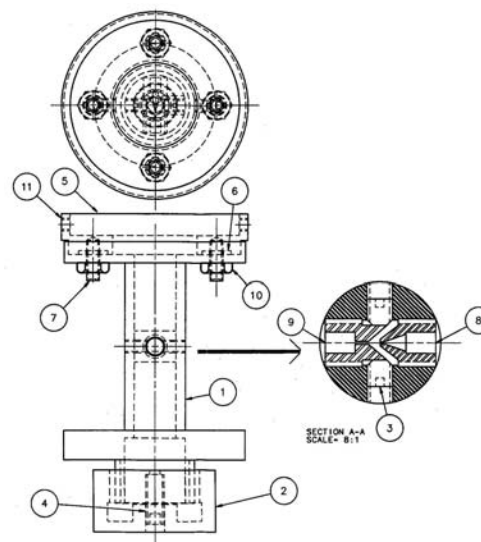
Compass design: 1 – field sensor body; 2 – balancing nut; 3 – wire fixing screw; 4 – balancing nut locking screw; 5 – mirror adjuster; 6 – four spring lock washers; 7 – four mirror adjustment screws; 8 – wire clamp adjustment screw; 9 – wire clamp; 10 – four mirror adjustment nuts; 11 – four mirror fixing screws.
